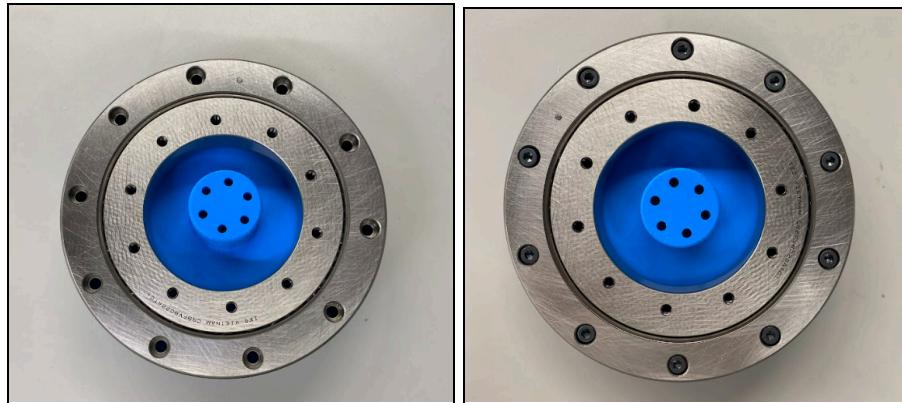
J1 Mushroom Cap to J1 Cross Roller Bearing
